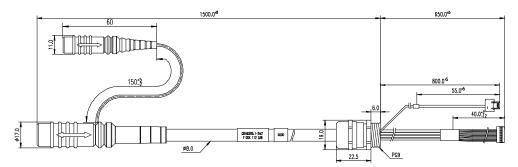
CBAM305.1-2m2 Cable - Dimensions
